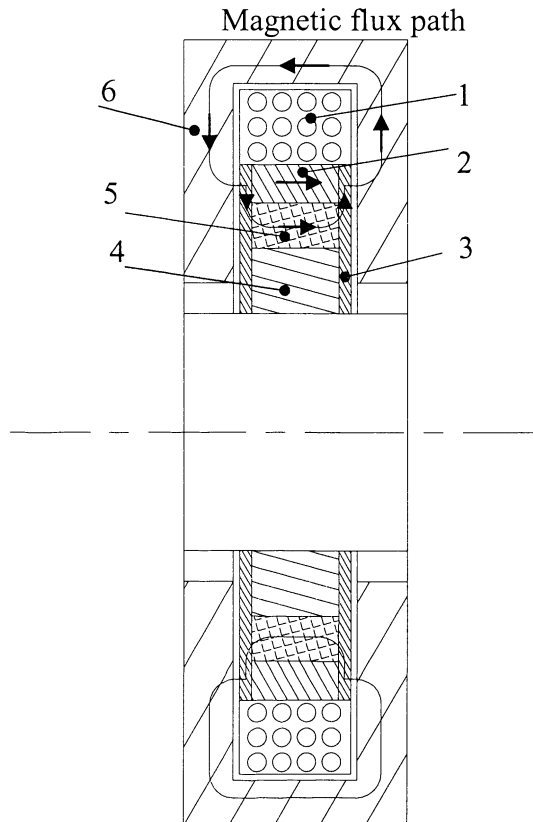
Magnetic flux path, 1: Coil; 2: Outer ring; 3: Mild steel overlap sheet; 4: Inner ring; 5: MRE specimen; 6: Mild steel core
